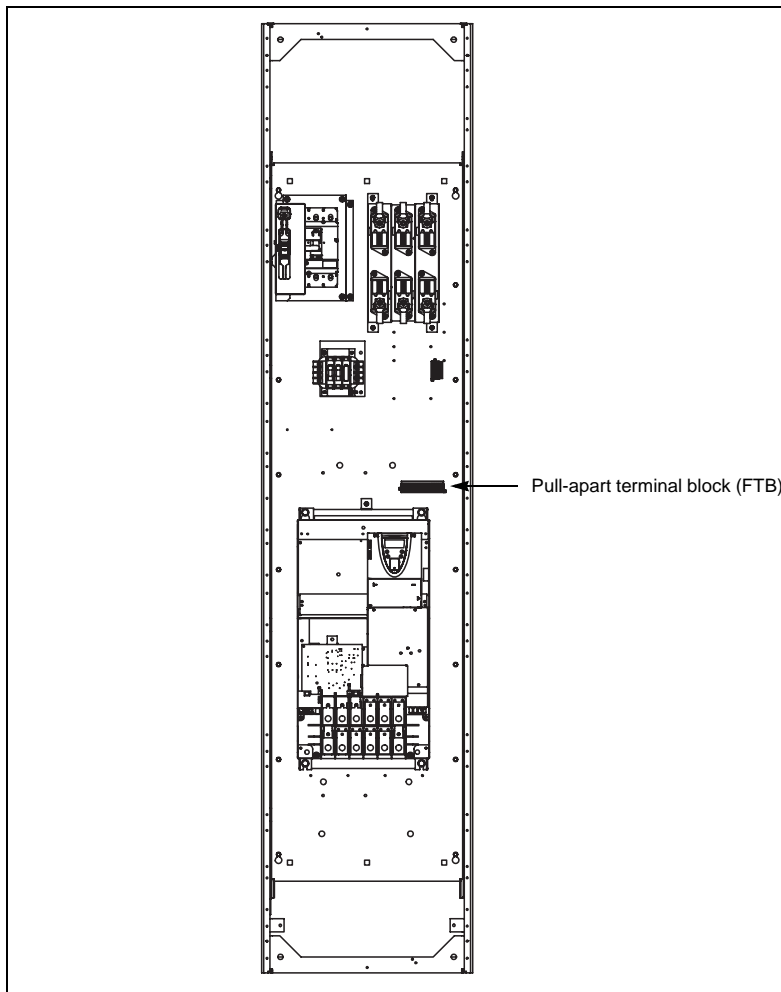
Location of FTB Terminal Block (Typical for NEMA 1/1A MCCs, Frame Sizes 9–13B)
